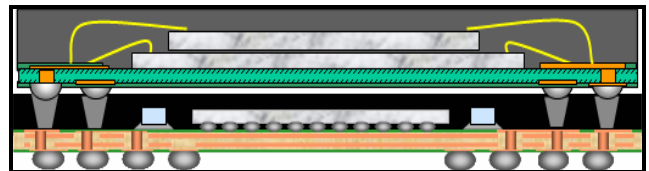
Fully molded PoP base package with FC die, SMT passives with TMV technology connecting to standard combo memory type top package.
